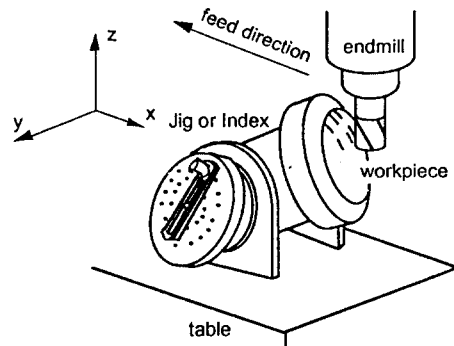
Inclined endmill machining using jig or index on 3-axis M/C
